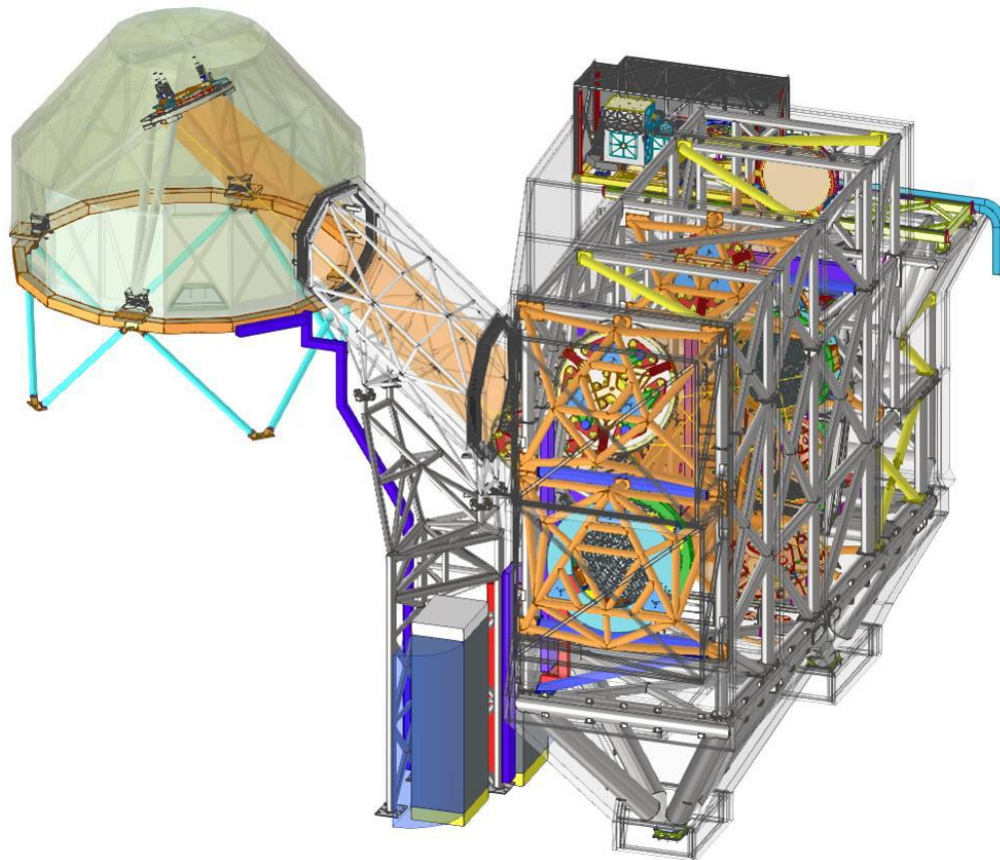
3D CAD model assembly of MORFEO Main Structure.
